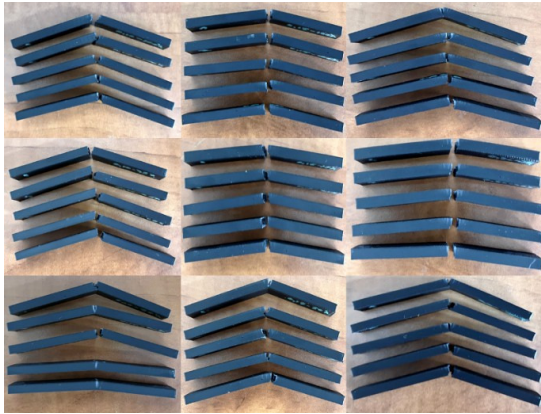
Additively manufactured specimens on the QIDI Q1 Pro 3D printer, after performing the three-point bending test on the Barrus White 20 kN machine
